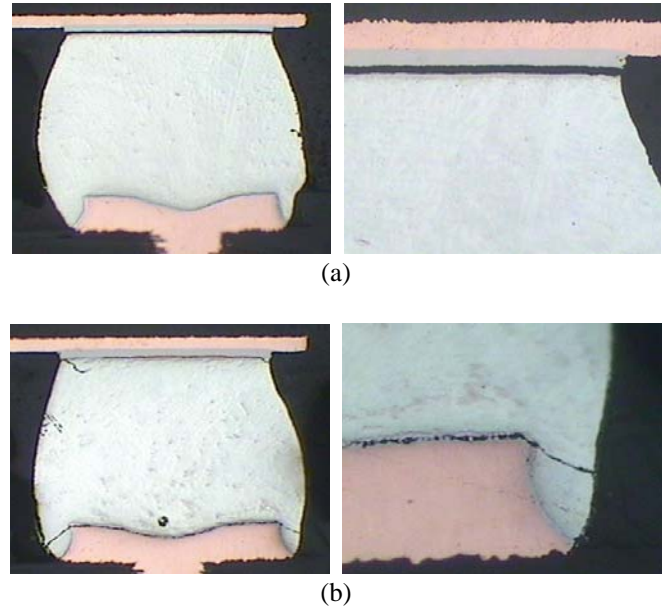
Optical microscope observations of solder joint cross section after drop tests; (a) Solder joint crack between bottom package substrate metal pad and intermetallic compound, (b) Solder joint crack between test board metal pad and IMC interface
